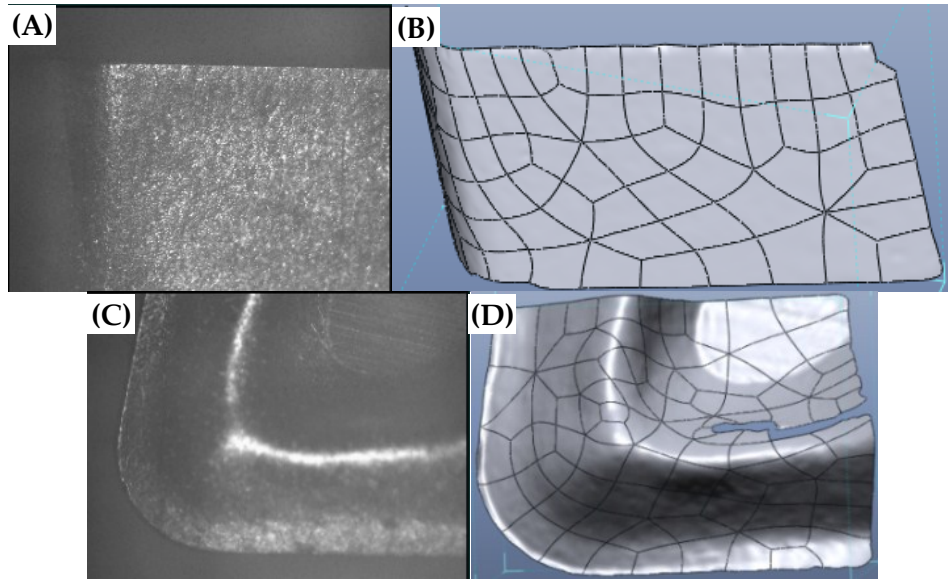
Sandvik (milling): (A, B) Flank, (C, D) Rake faces
